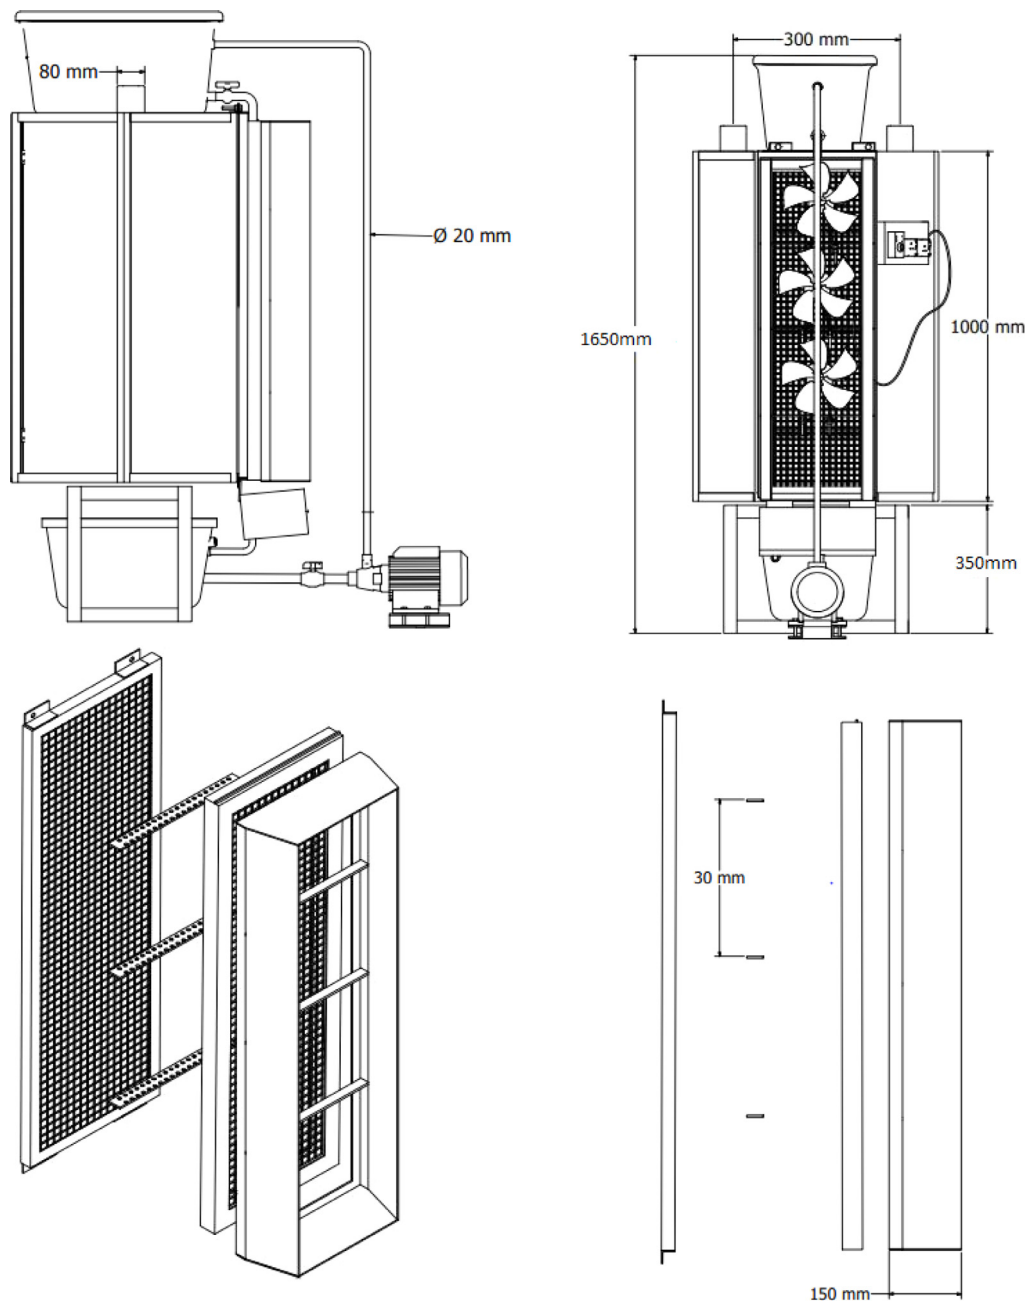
Isometric view of the developed evaporative cooling system and cooling pad holder showing the front and side elevations.
